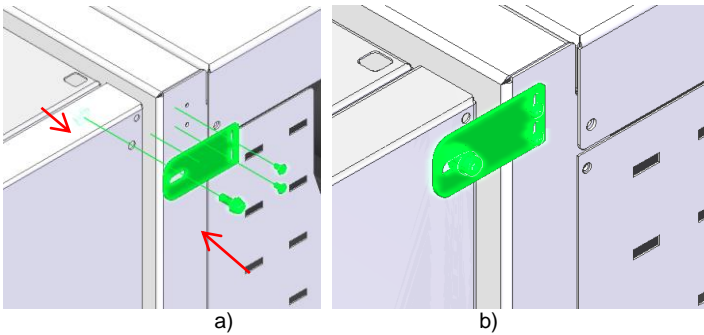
Attaching and securing the storage unit to the boiler – Rear view
